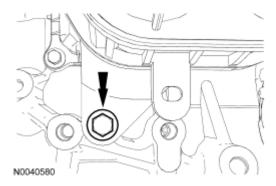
Locating Intake Manifold Lower Bolt Courtesy of FORD MOTOR CO.
